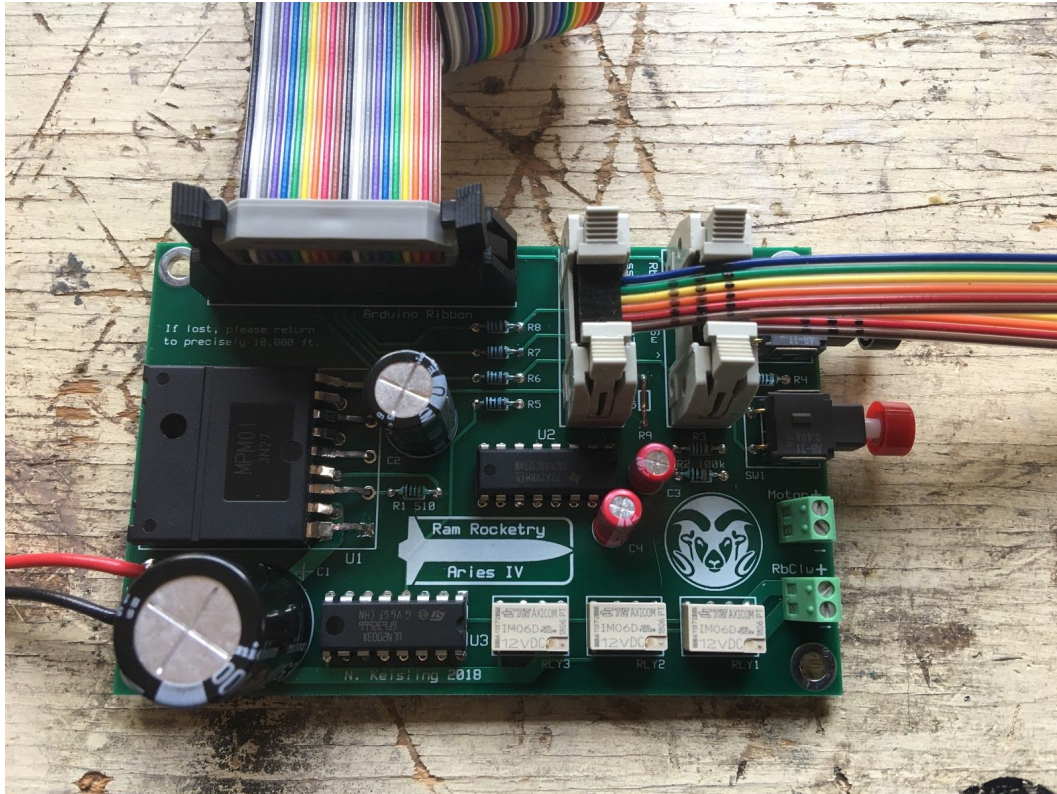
Custom PCB with signal/power conditioning and mechanism failsafe.
